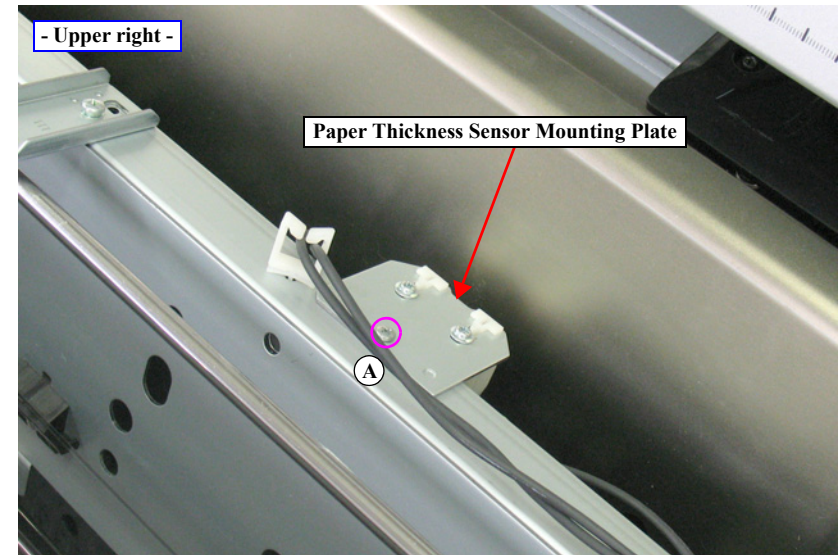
Removing the Paper Thickness Sensor Mounting Plate
